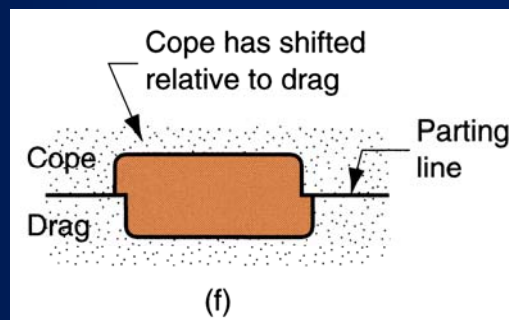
Common defects in sand castings: (f) mold shift
